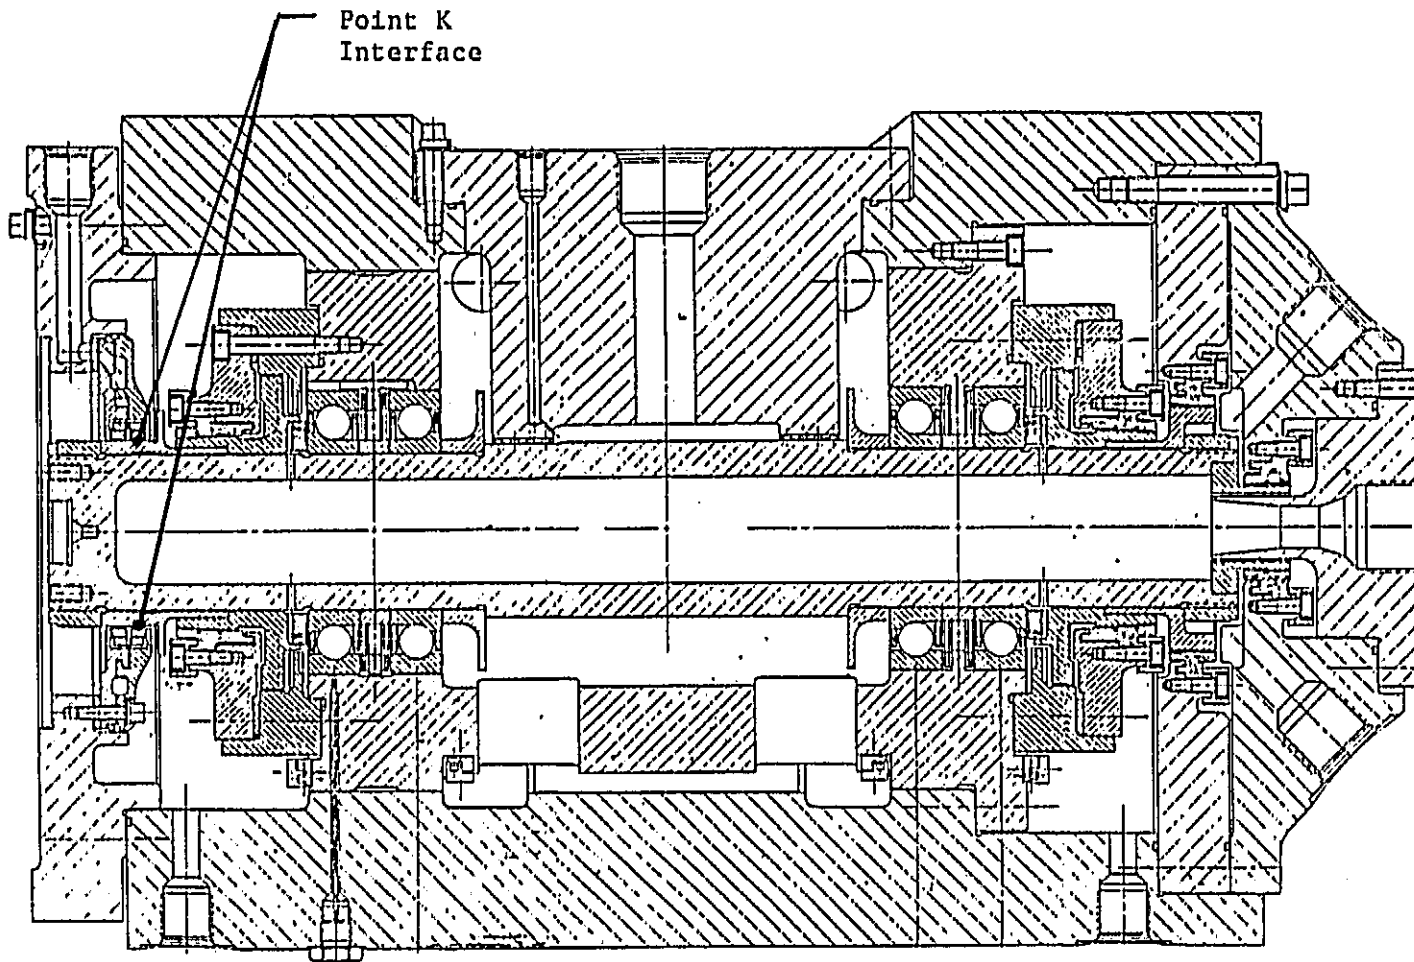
Inco 718 Seal to Helium Seal (Point K)
